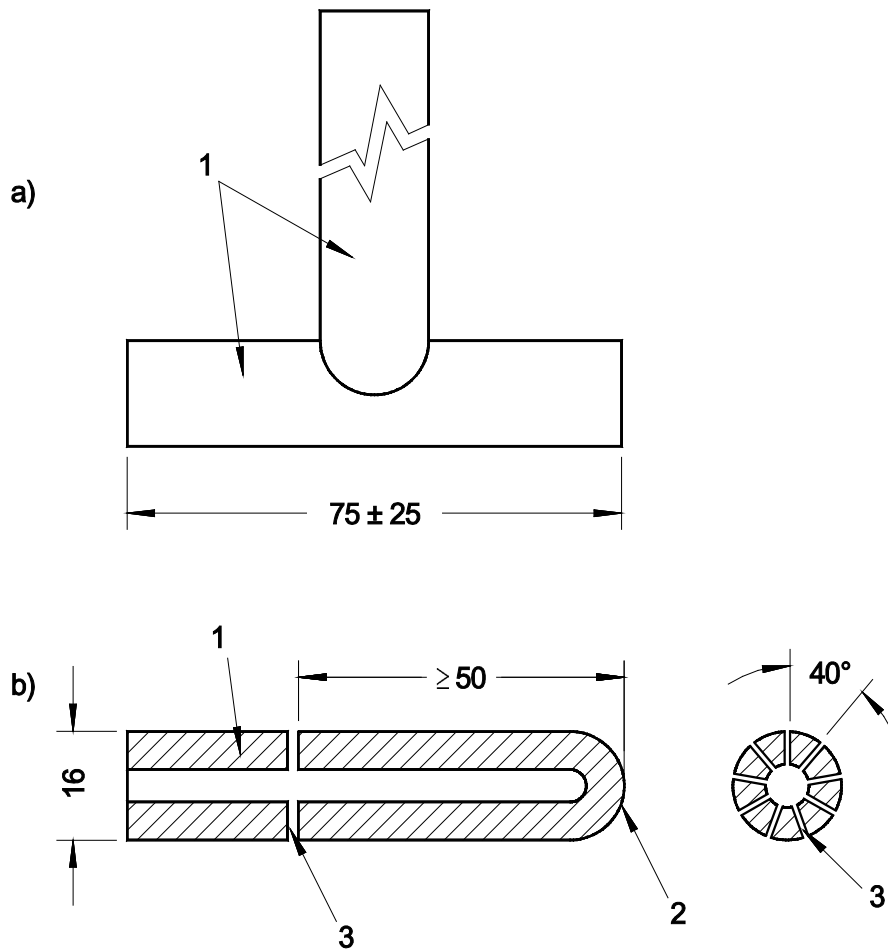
Examples of surface thermocouple junction and insulating pad
